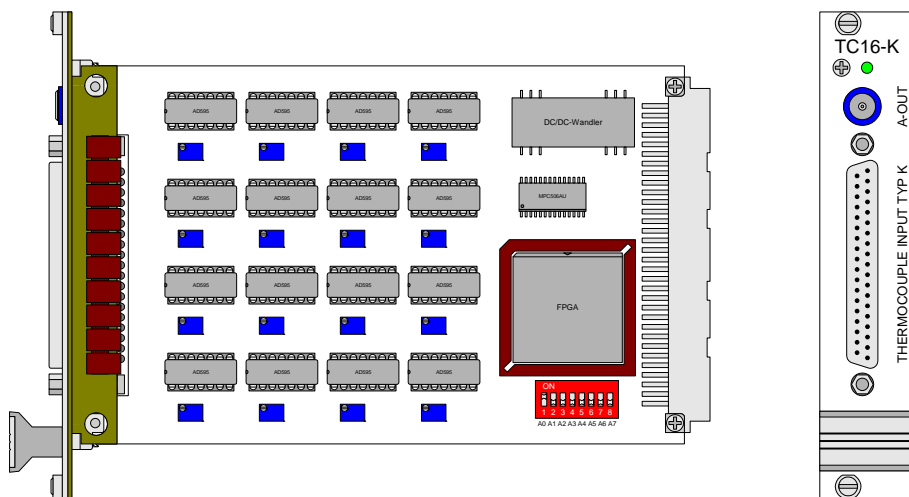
Pro-TC-16-K-D REVA: Board and front panel
